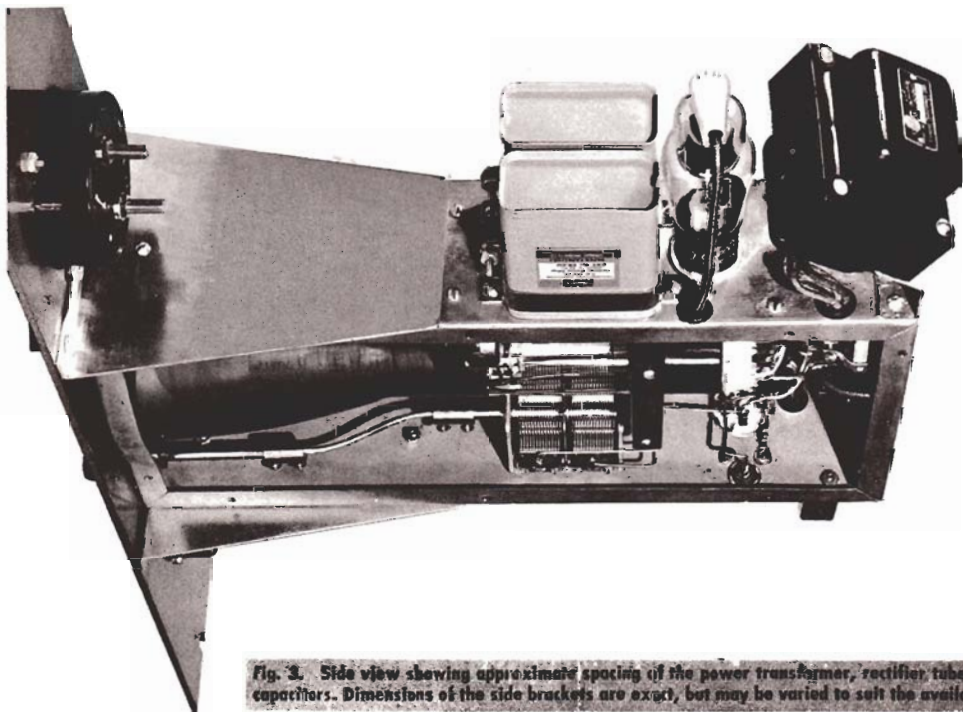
Side view showing approximate spacing of the power transformer, rectifier tube and filter capacitors. Dimensions of the side brackets are exact, but may be varied to suit the available space.
